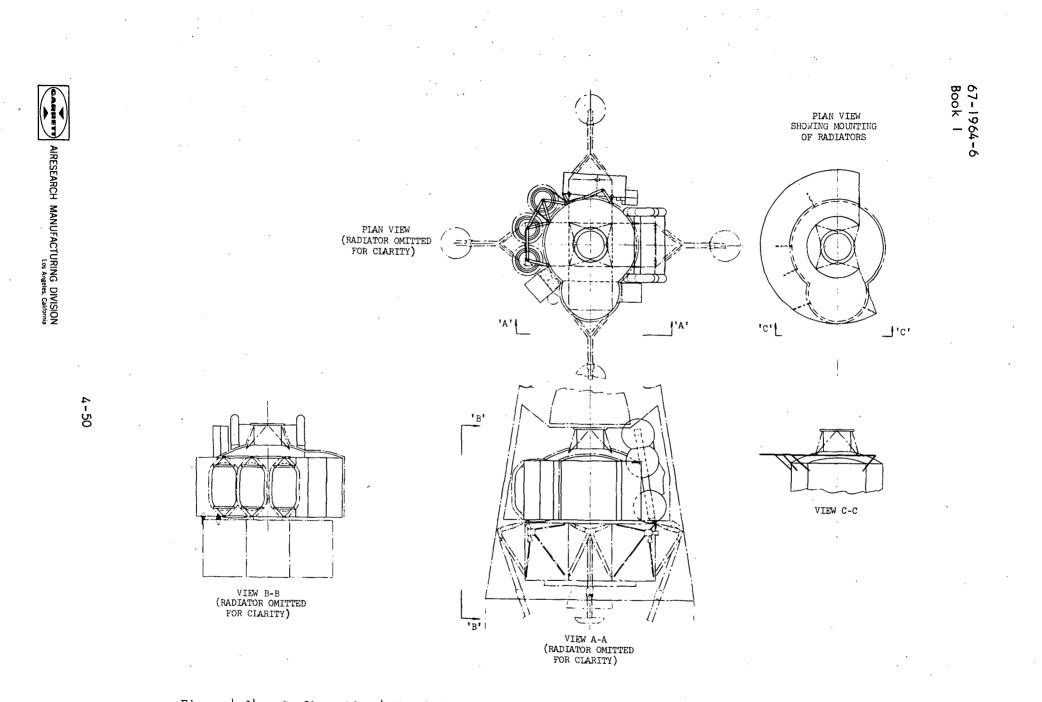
Configuration 4 Vertical Cylinder Outboard Equipment Structural Arrangement
